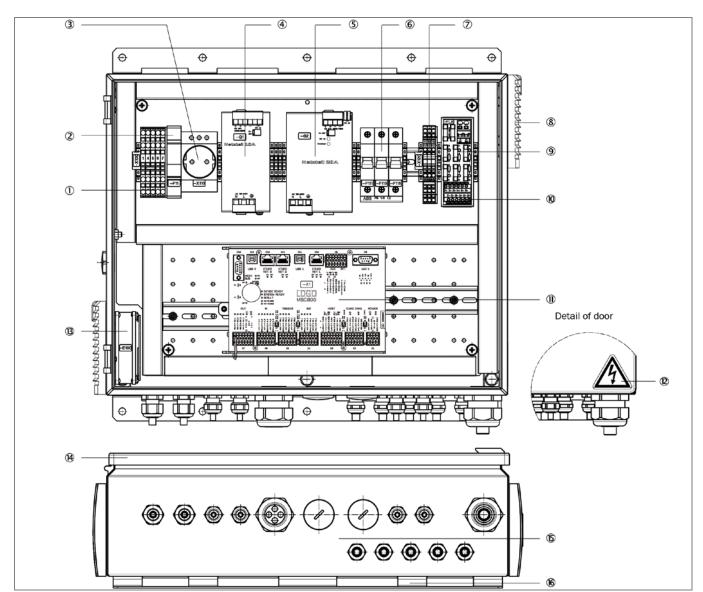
MSC800-2100 device view (internal view with open door and view from below)
